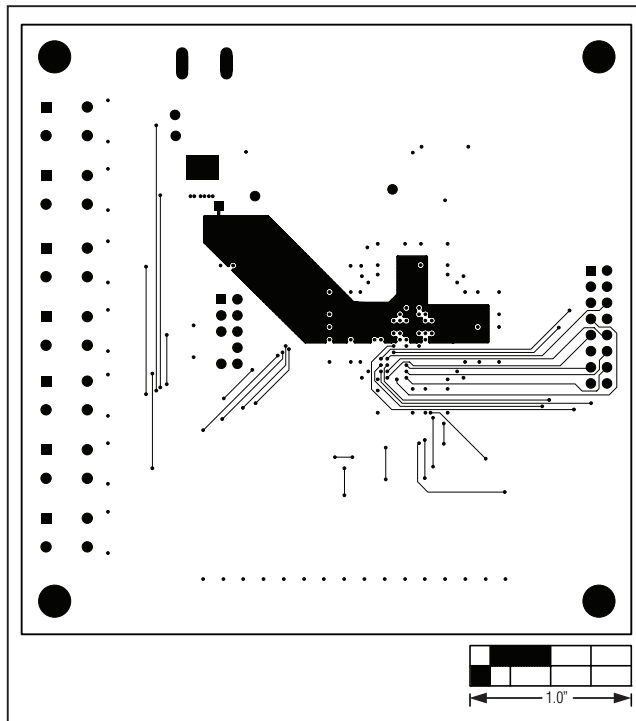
MAX4940 Master Board PCB Layout—Solder Side
